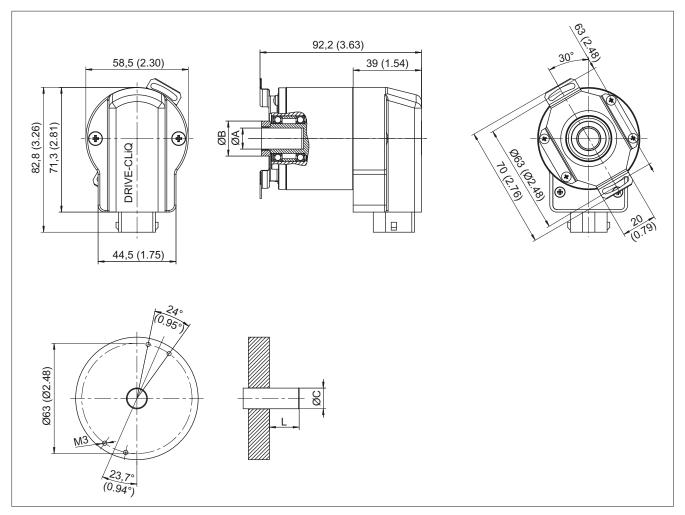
Dimension drawing of hollow shaft, all data in mm and (inches)
